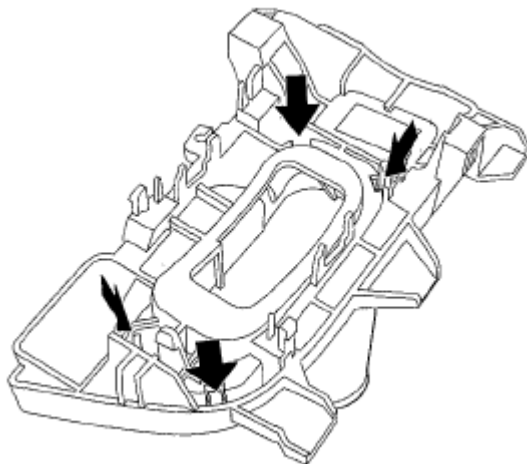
Identifying Lock Tabs Retaining Shift Lever Boot
